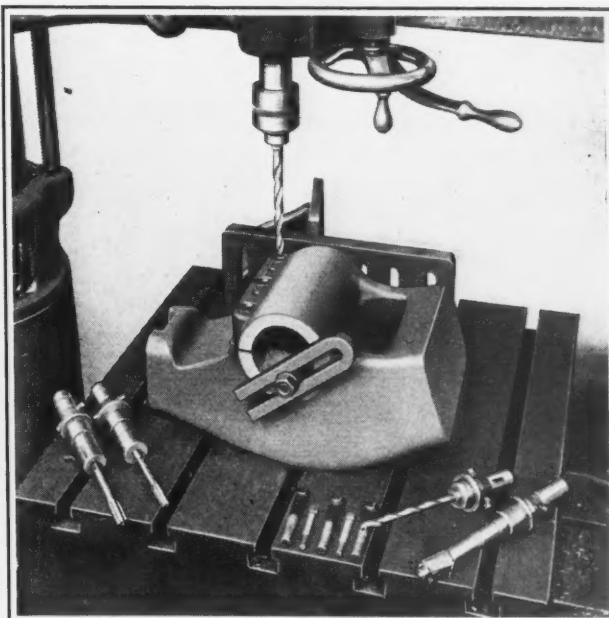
Drilling, Counterboring, and Tapping Bolt Holes
